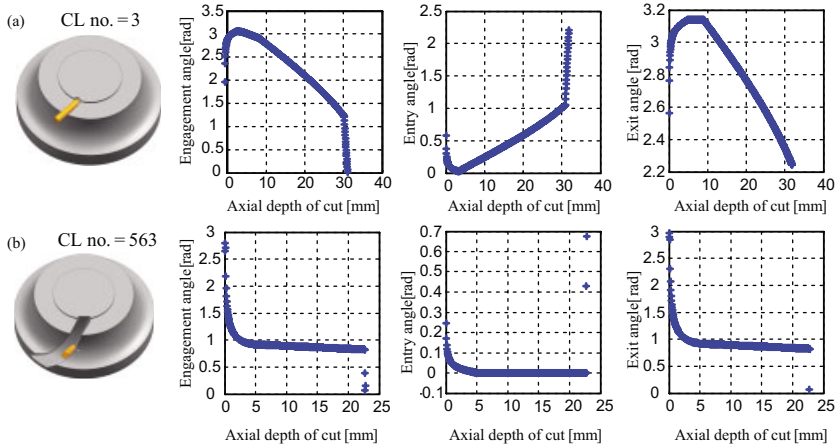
Ball end milling of an impeller at two different cutter locations
